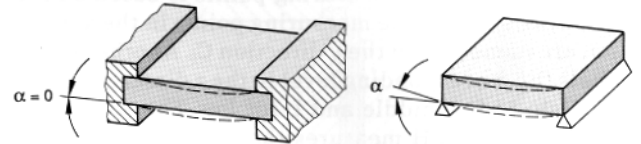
Two-sided clamping and freely supporting methods of holding the molding plate represent the limiting cases of molding plate fixture
